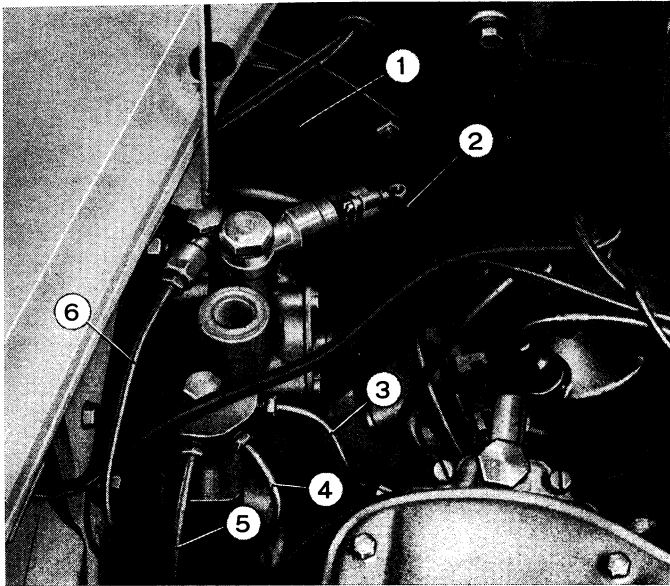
Detail of brake booster mounting on 1500 Cabriolet.
